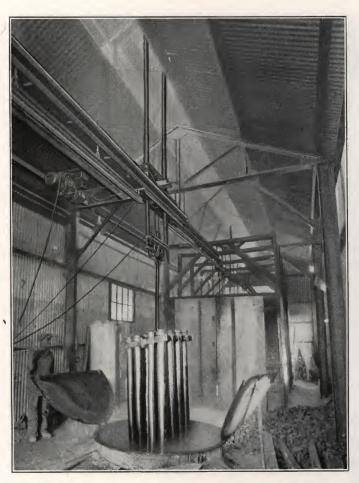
A—Coating of cast iron pipe performed by electric hoist operated dipping machine with plunger type guides.
